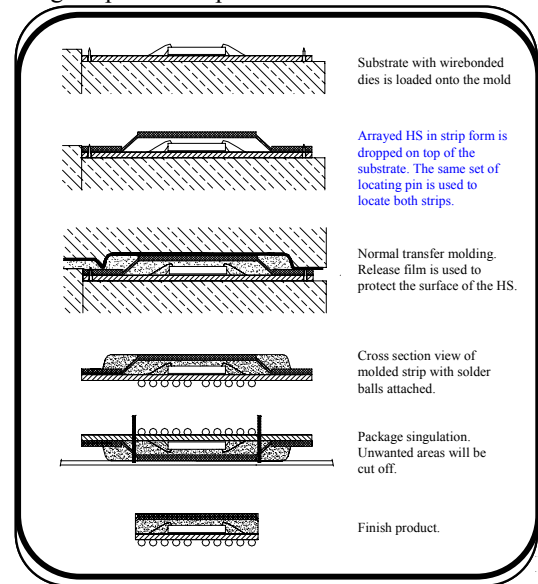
Method of making XP-FBGA with embedded heat-spreader.
